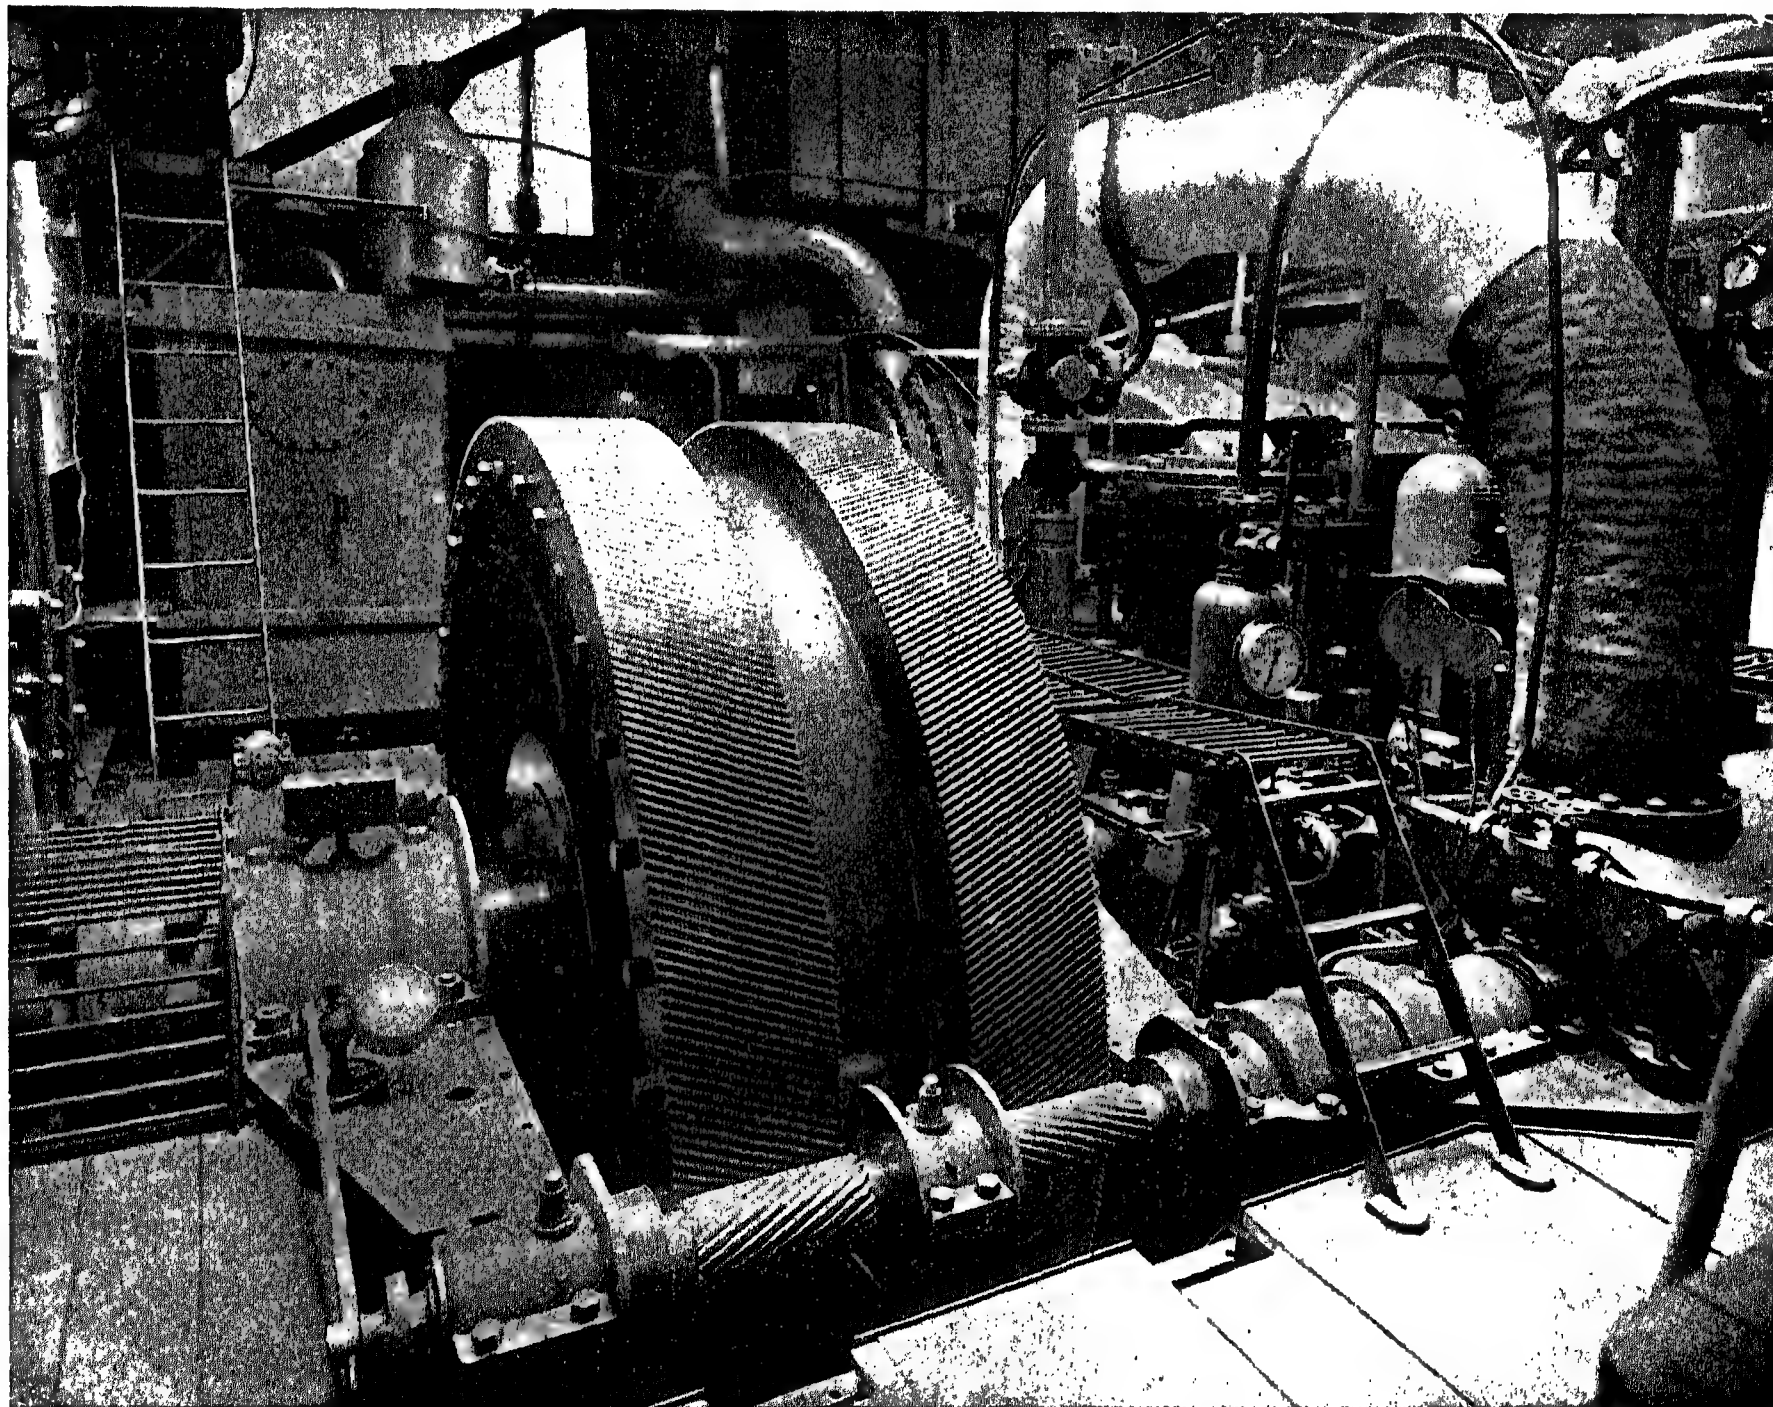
S.S. *Vespasian* Engine-room, showing Gearing with Cover Removed
